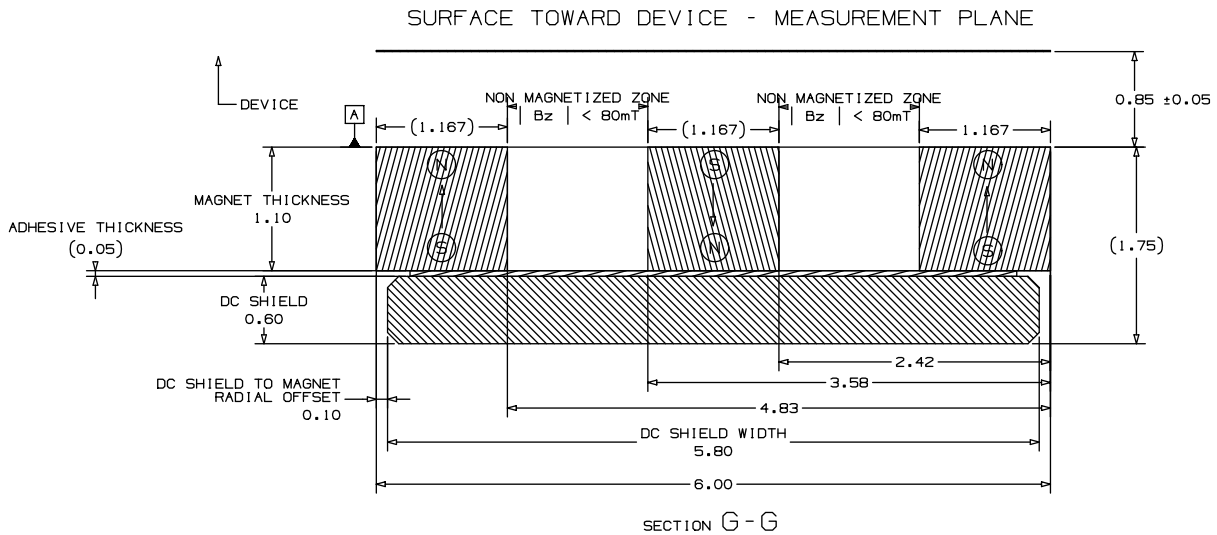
MagSafe Orientation Magnet Dimensions
